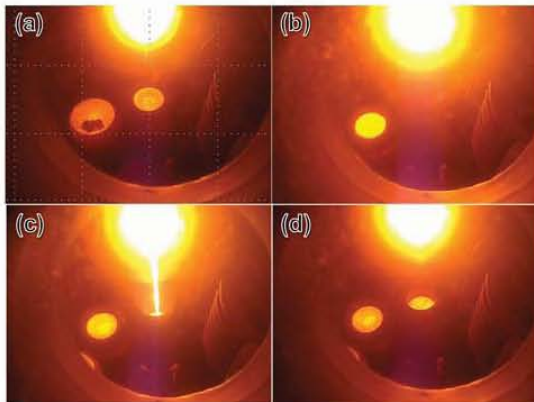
Photographs of continuous ingot fabrication with Eng. scale equipment.
